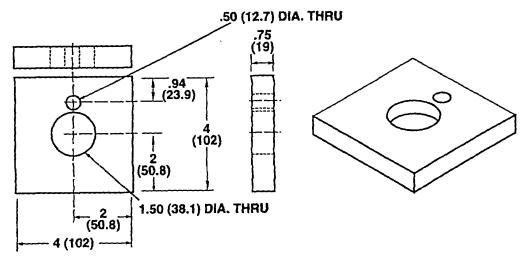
Turbocharger Holding Fixture (PN 2SK742)
